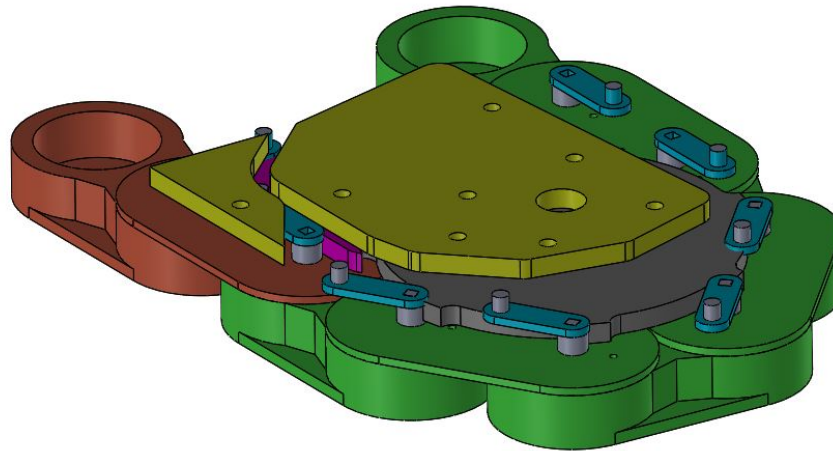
Isometric view of tip design, visualizing forced rotation of the locking crank.
